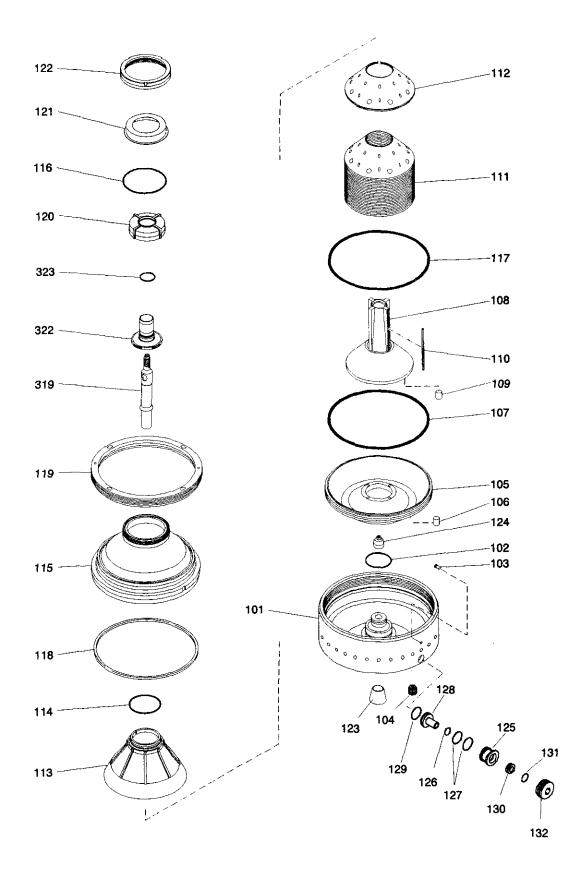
Bowl Assembly Drawing (SJ10F, 15F, 30F)
